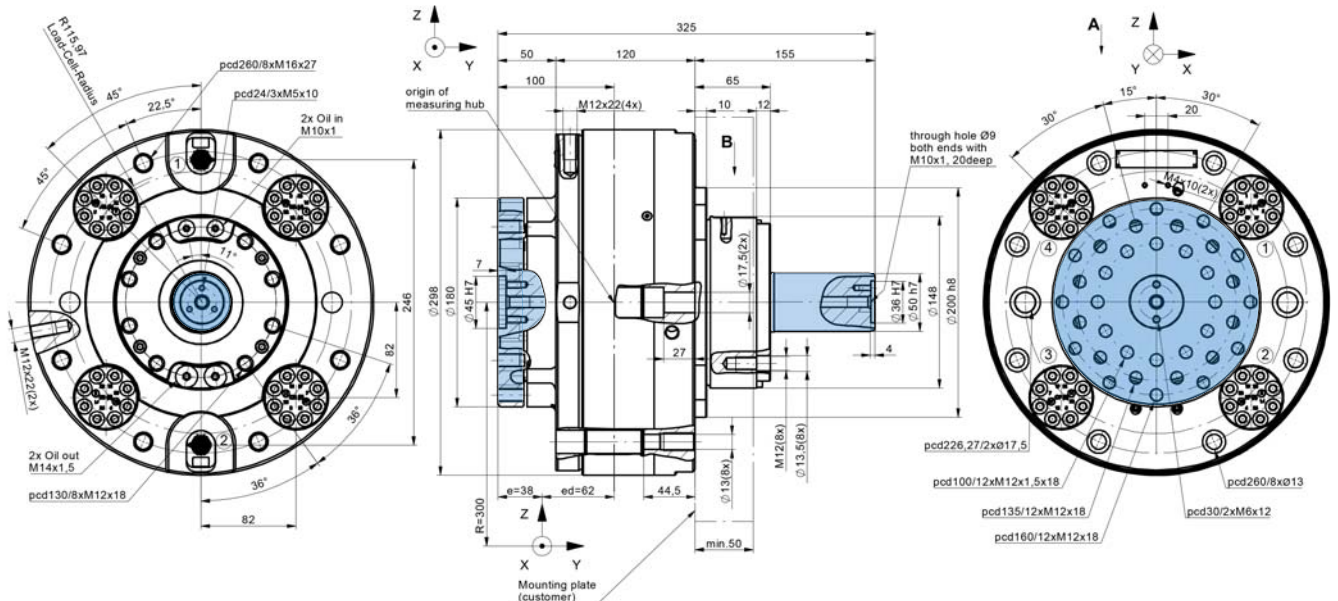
Dimensions of RoaDyn® S530, Type 9289A013A; rotating parts are highlighted in blue
